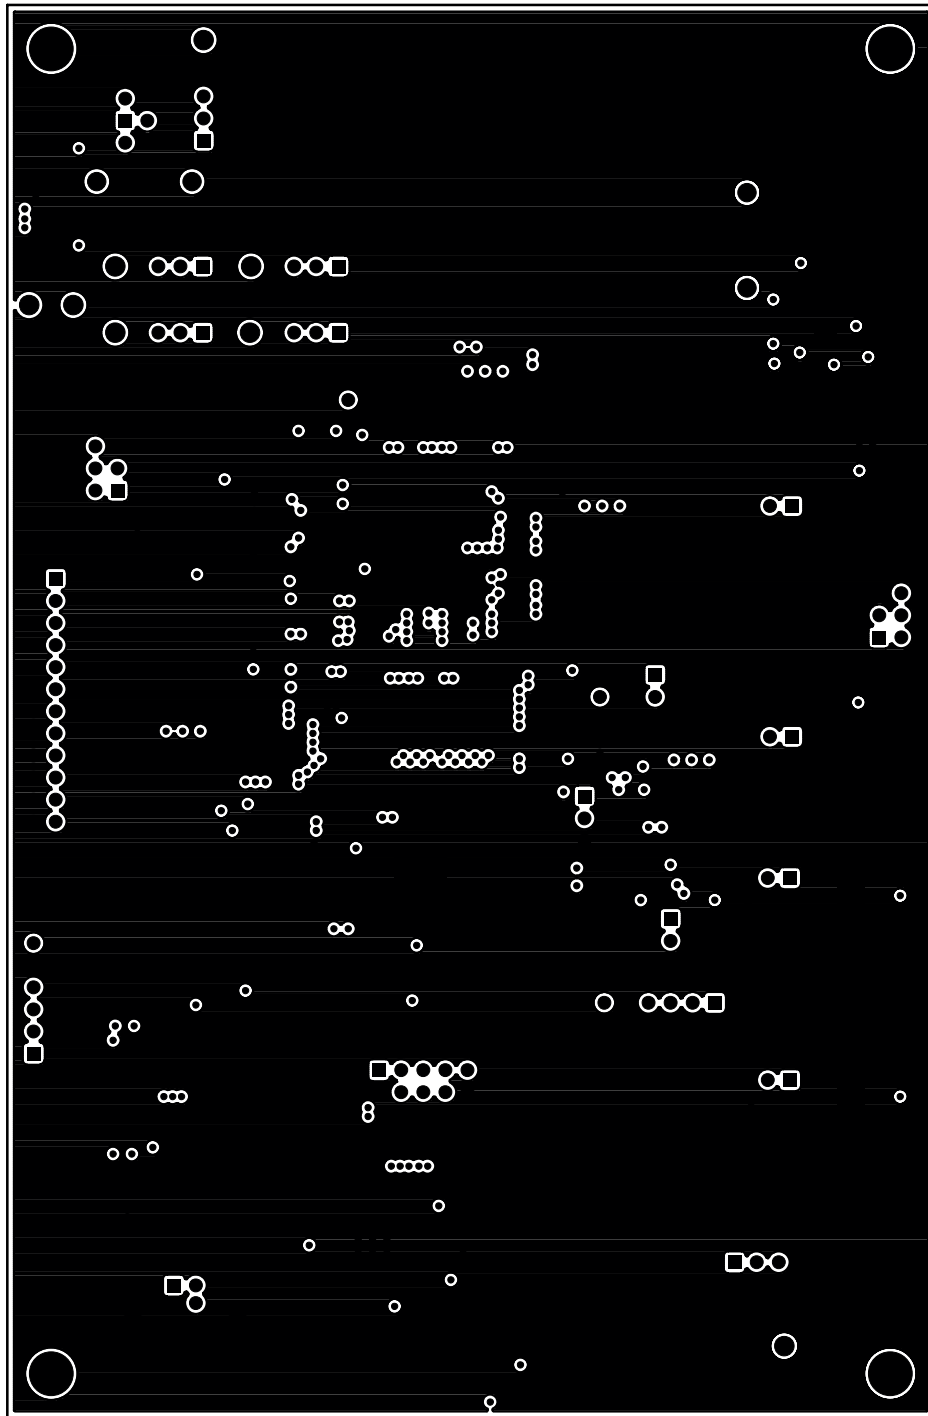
MAX44000 EV Kit PCB Layout—Layer 2
